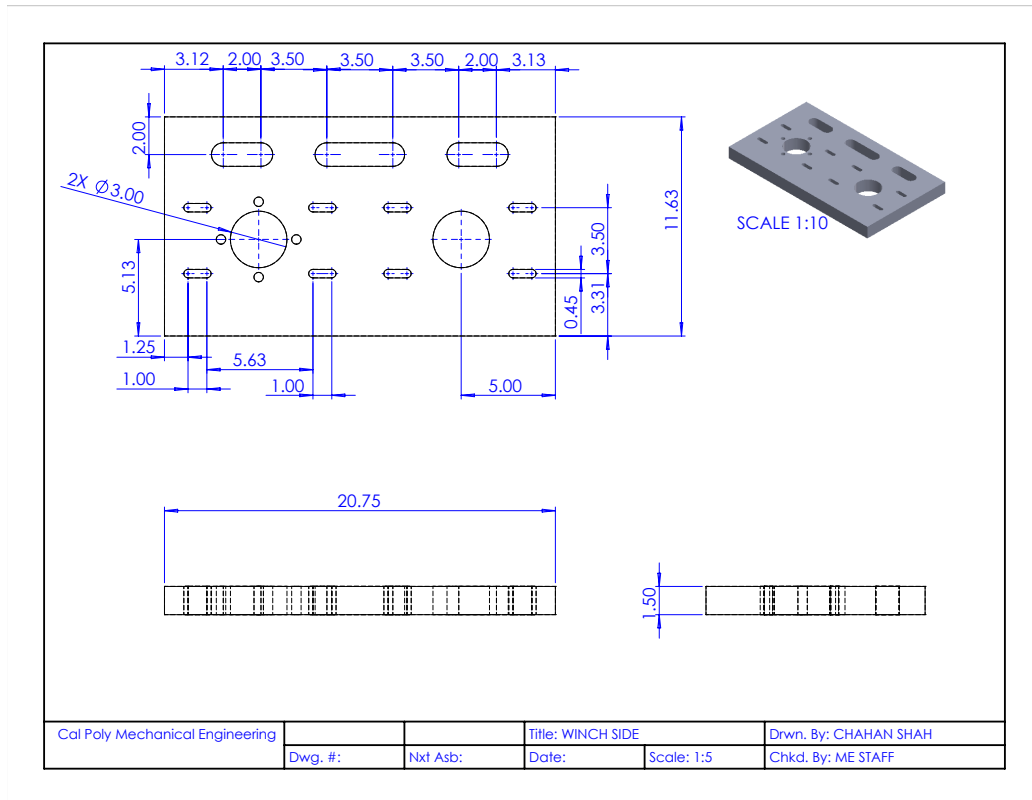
Drawing of side plate of the winch that will be bolted to the connector plate.
